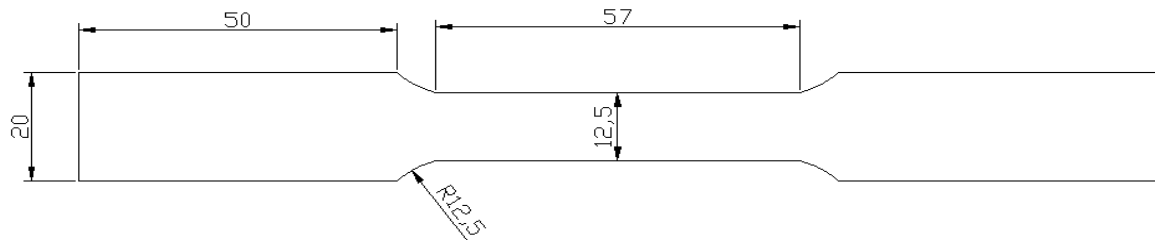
A Tow Dimension of the specimen (Non-weld) (mm)
